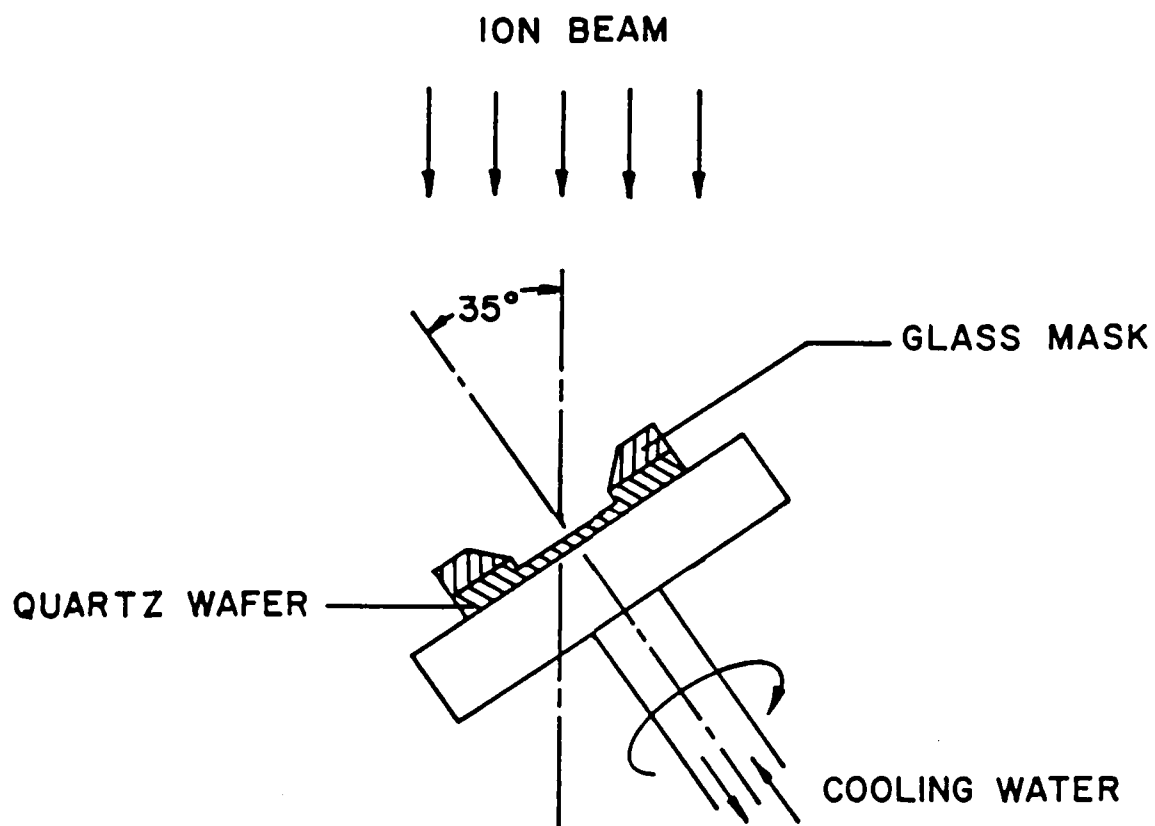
FIXTURE ARRANGEMENT FOR ION MILLING
